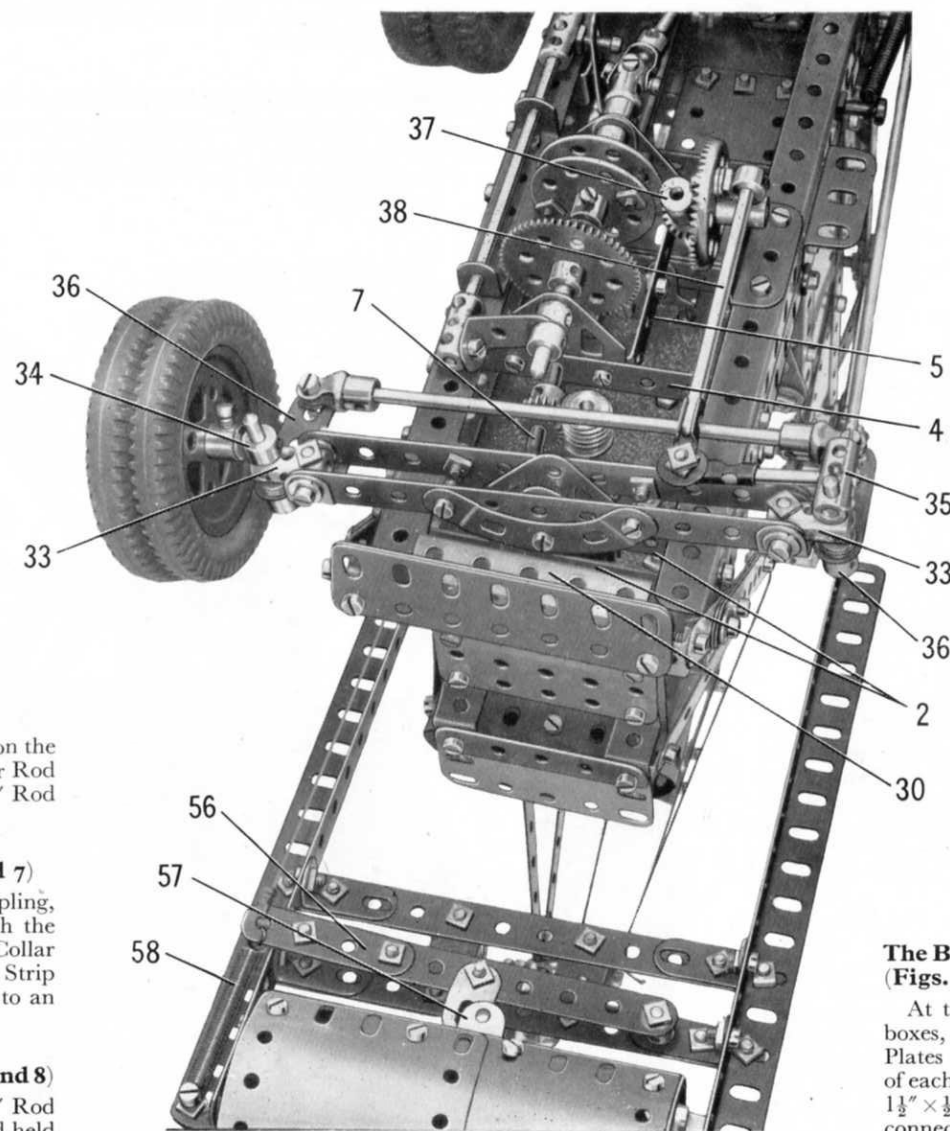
A front and end view showing the pivoted front axle beam and details of the steering mechanism
